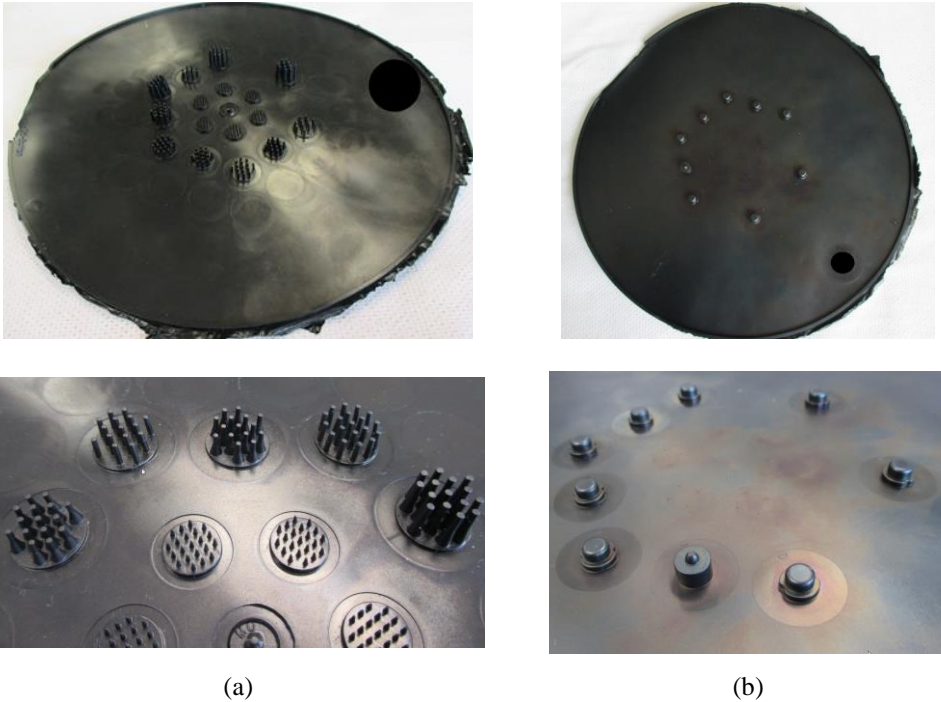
(a) The molded sheet on the pin side. (b) The molded sheet on the connector side.
